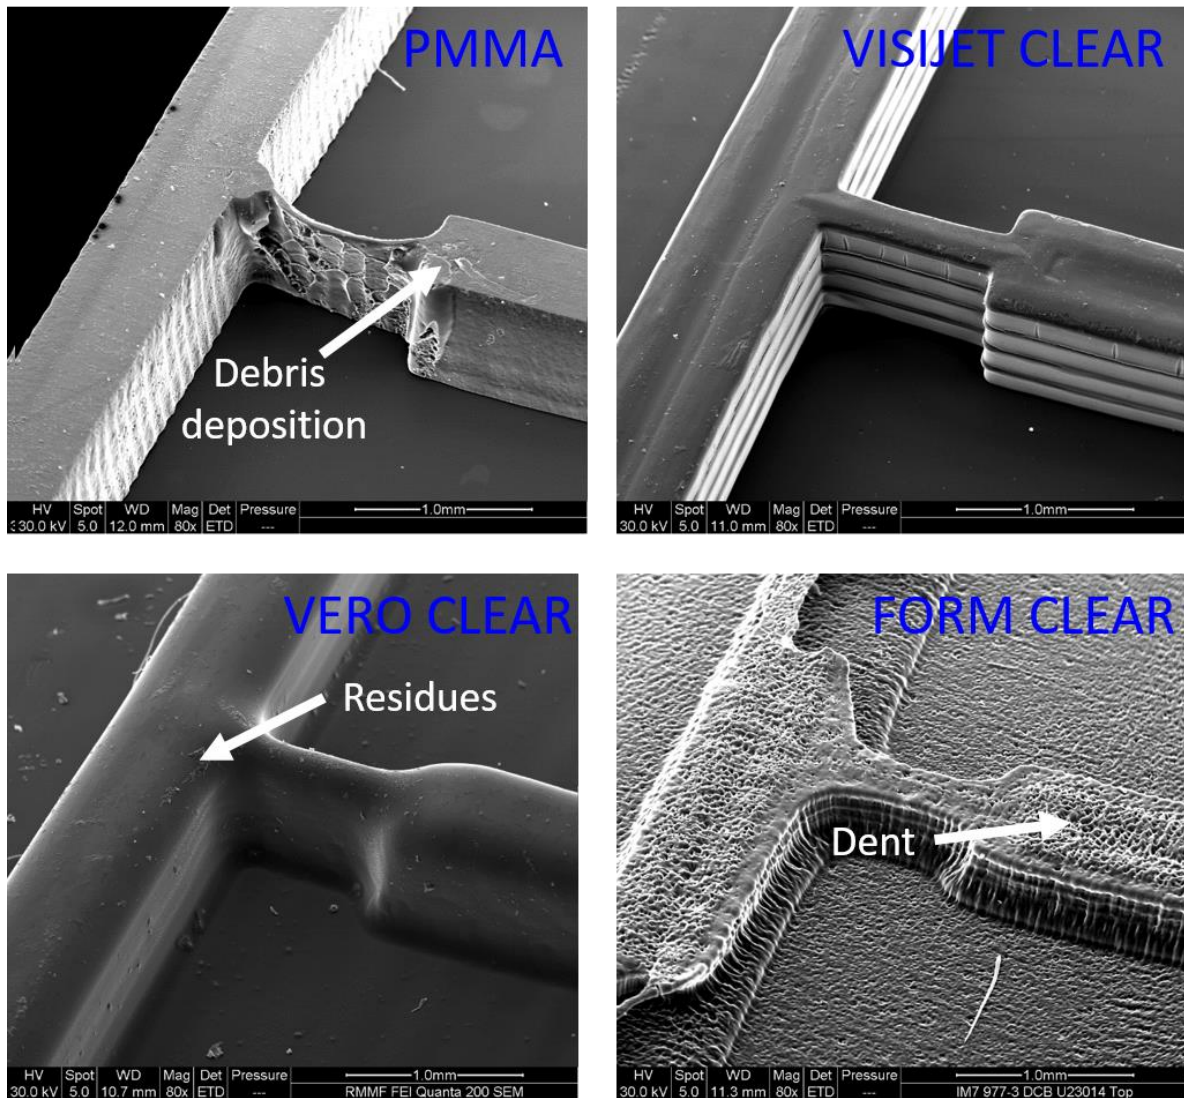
Comparison of topographic surfaces using SEM, depicting the top surfaces of the larvae trap. All the 3D printed moulds achieved a smooth top surface finish apart from the Form Clear mould, which suffered from incomplete layering of the resin while printing.
